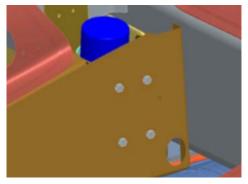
SECURE ROCKET MOUNT TO STARBOARD CENTER ROOT RIB
